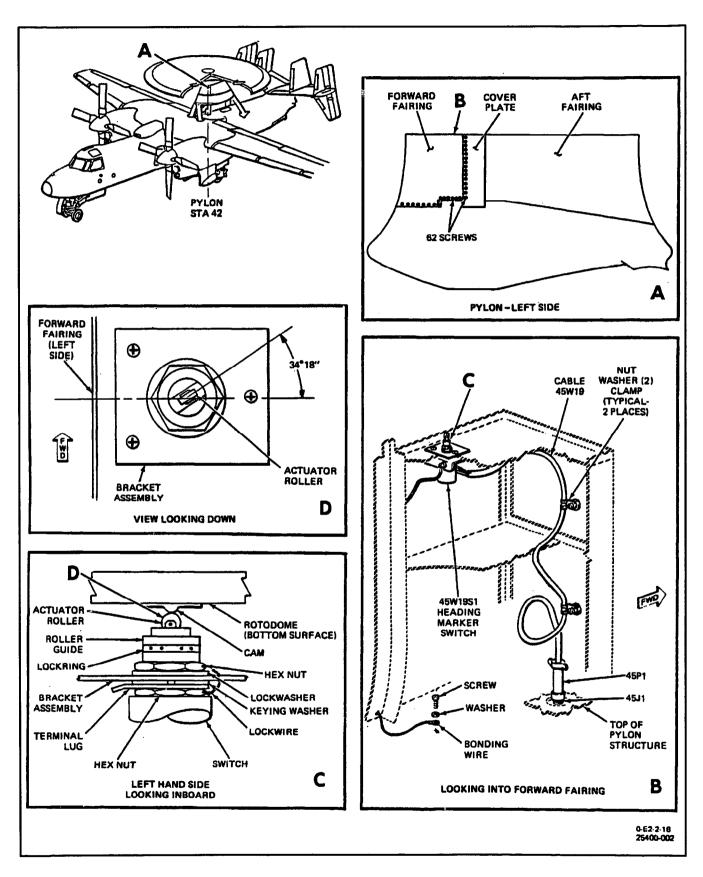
Removal and Installation of Ownship Heading Marker Switch on Fixed Fairing Door
